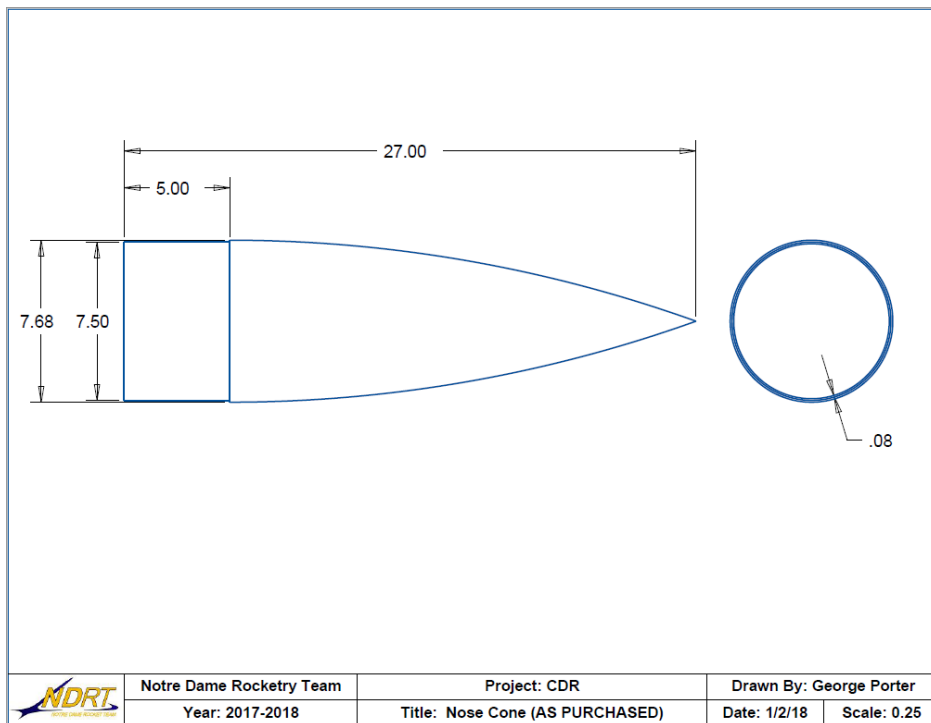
Side and bottom views of full-scale nosecone as purchased. Dimensions in inches.
